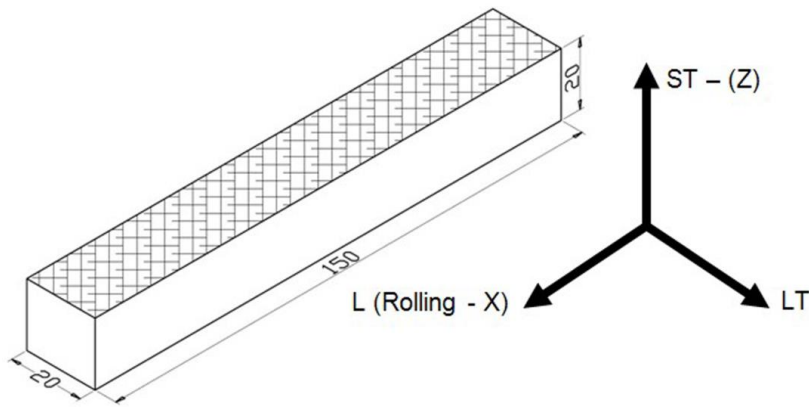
Tested aluminium alloy plate with dimensions in mm (surface of interest hatched).
